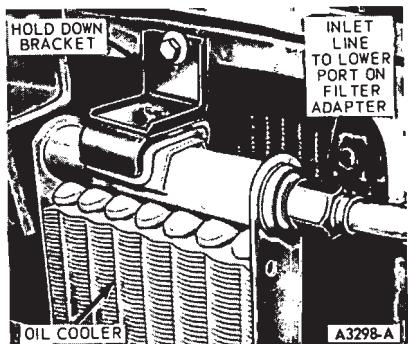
Engine Oil Cooler Installed—302 BOSS Engine
